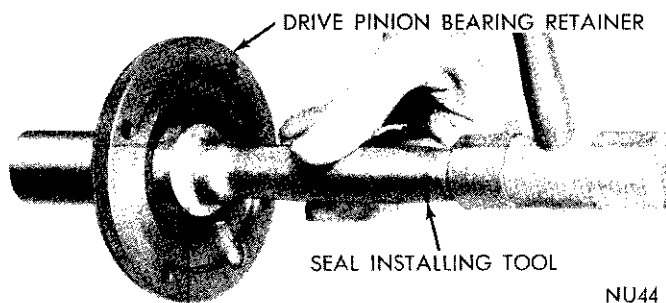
Installing Seal in Drive Pinion Bearing Retainer
